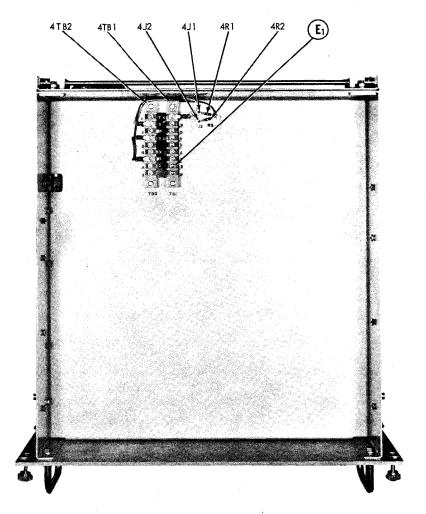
Electrical Equipment Cabinet CY-3022/WRA-3, Unit 3, Test Points and Parts Location
